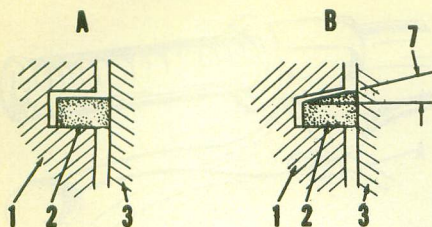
Keystone type piston and ring (B) is used on later models.
